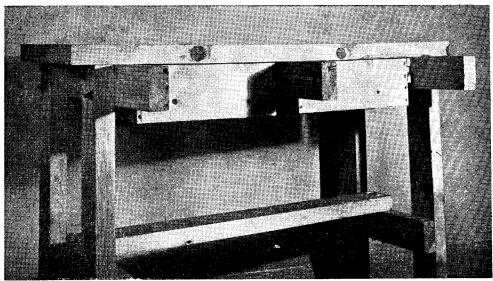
Showing how the cross-pieces are extended to the rear of the stand
